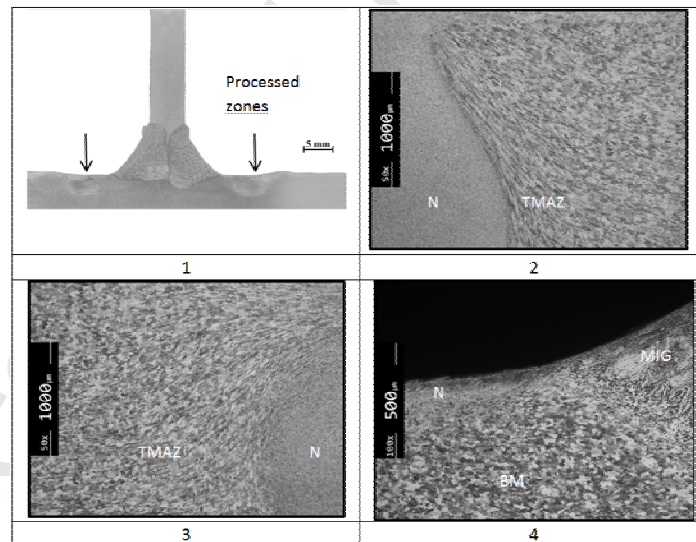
MIG welds made on AA 5083-H111 and processed with Tool D: 1) Macrograph; 2) Advancing side of stir zone; 3) Retreating side of stir zone; 4) Toe region.
